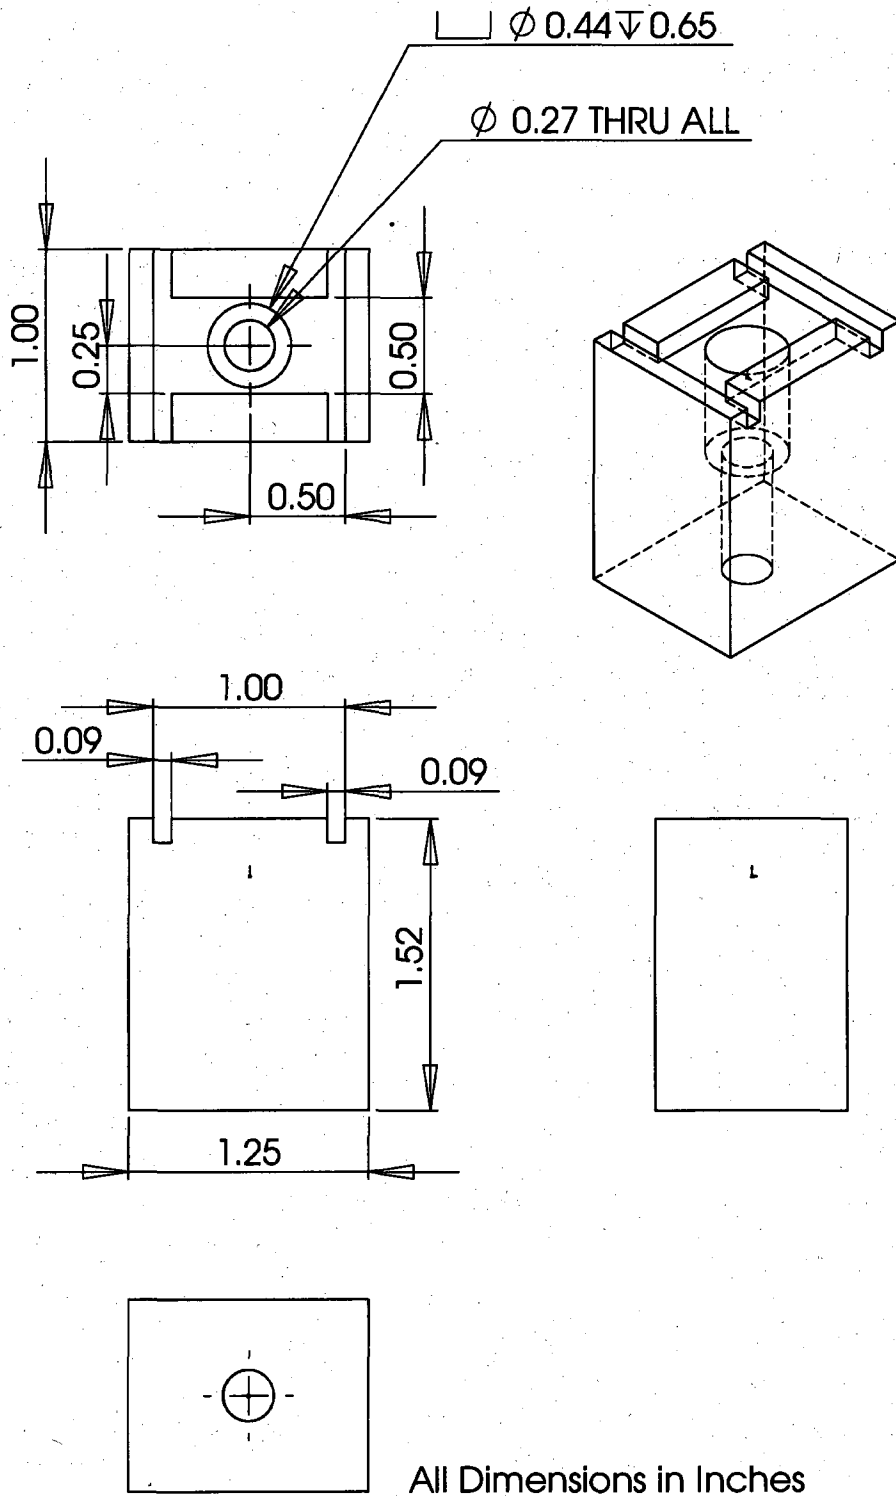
Mechanical Drawing: Pendulum platform assembly mount.
